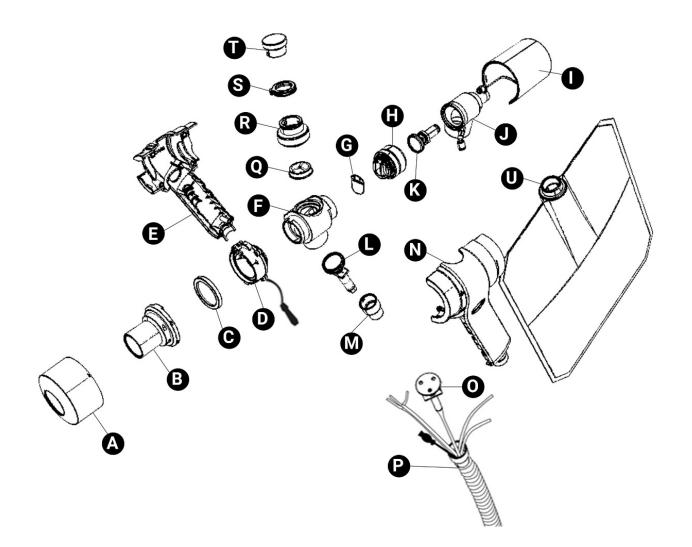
Exploded Assembly for Patient Valve with Inspiratory Bag
